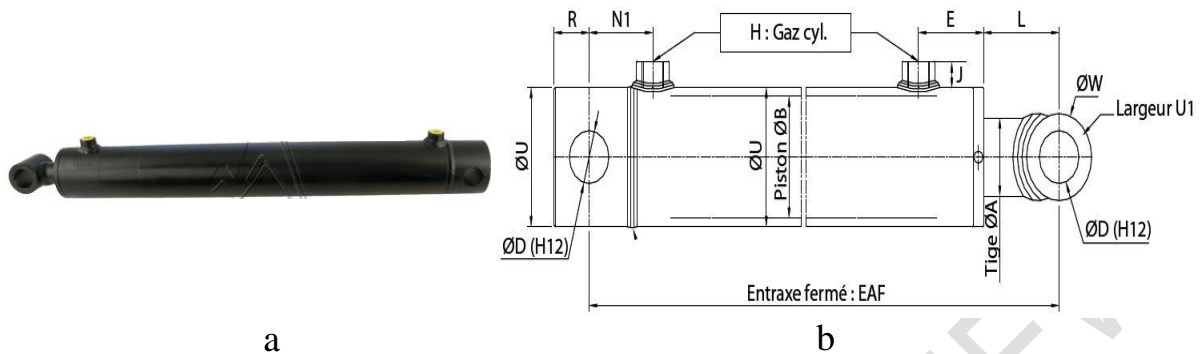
(a) Double acting hydraulic cylinder. (b) Dimensions of the cylinder
